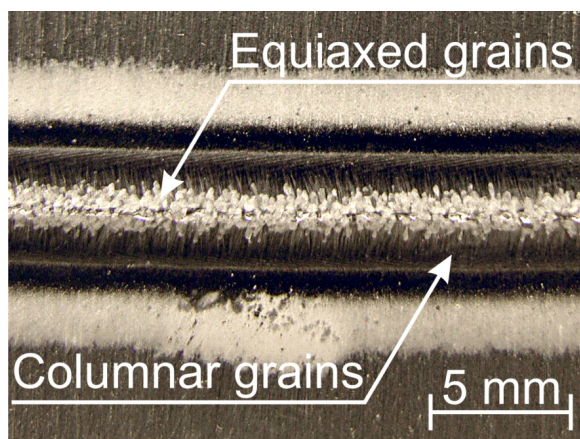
Photograph of a bottom weld bead produced at a total welding power of 4 kW and a welding speed of 40 mm/s.
